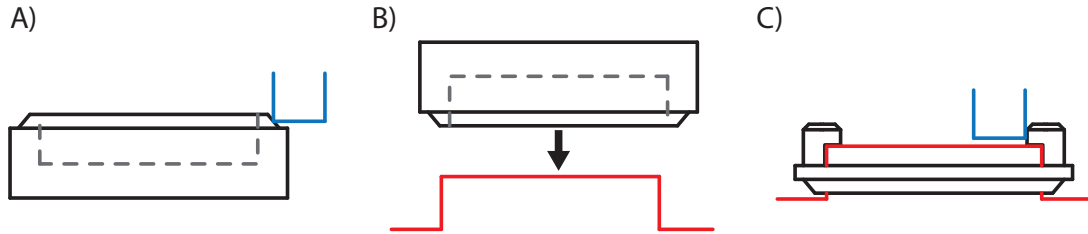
The fabrication process used for retaining ring prototypes with removal clips. A) First, the bottom features were machined into a cylindrical blank (endmill shown in blue). B) A locating post (red) was machined into sacrificial material, and the cylindrical blank was press-fit onto the post. C) With the center of the post known, the removal clips and other top features of the ring could be machined.
